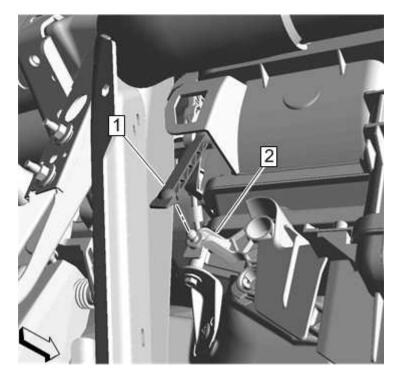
Vent Valve Link And Floor Air Valve Lever Courtesy of GENERAL MOTORS COMPANY
